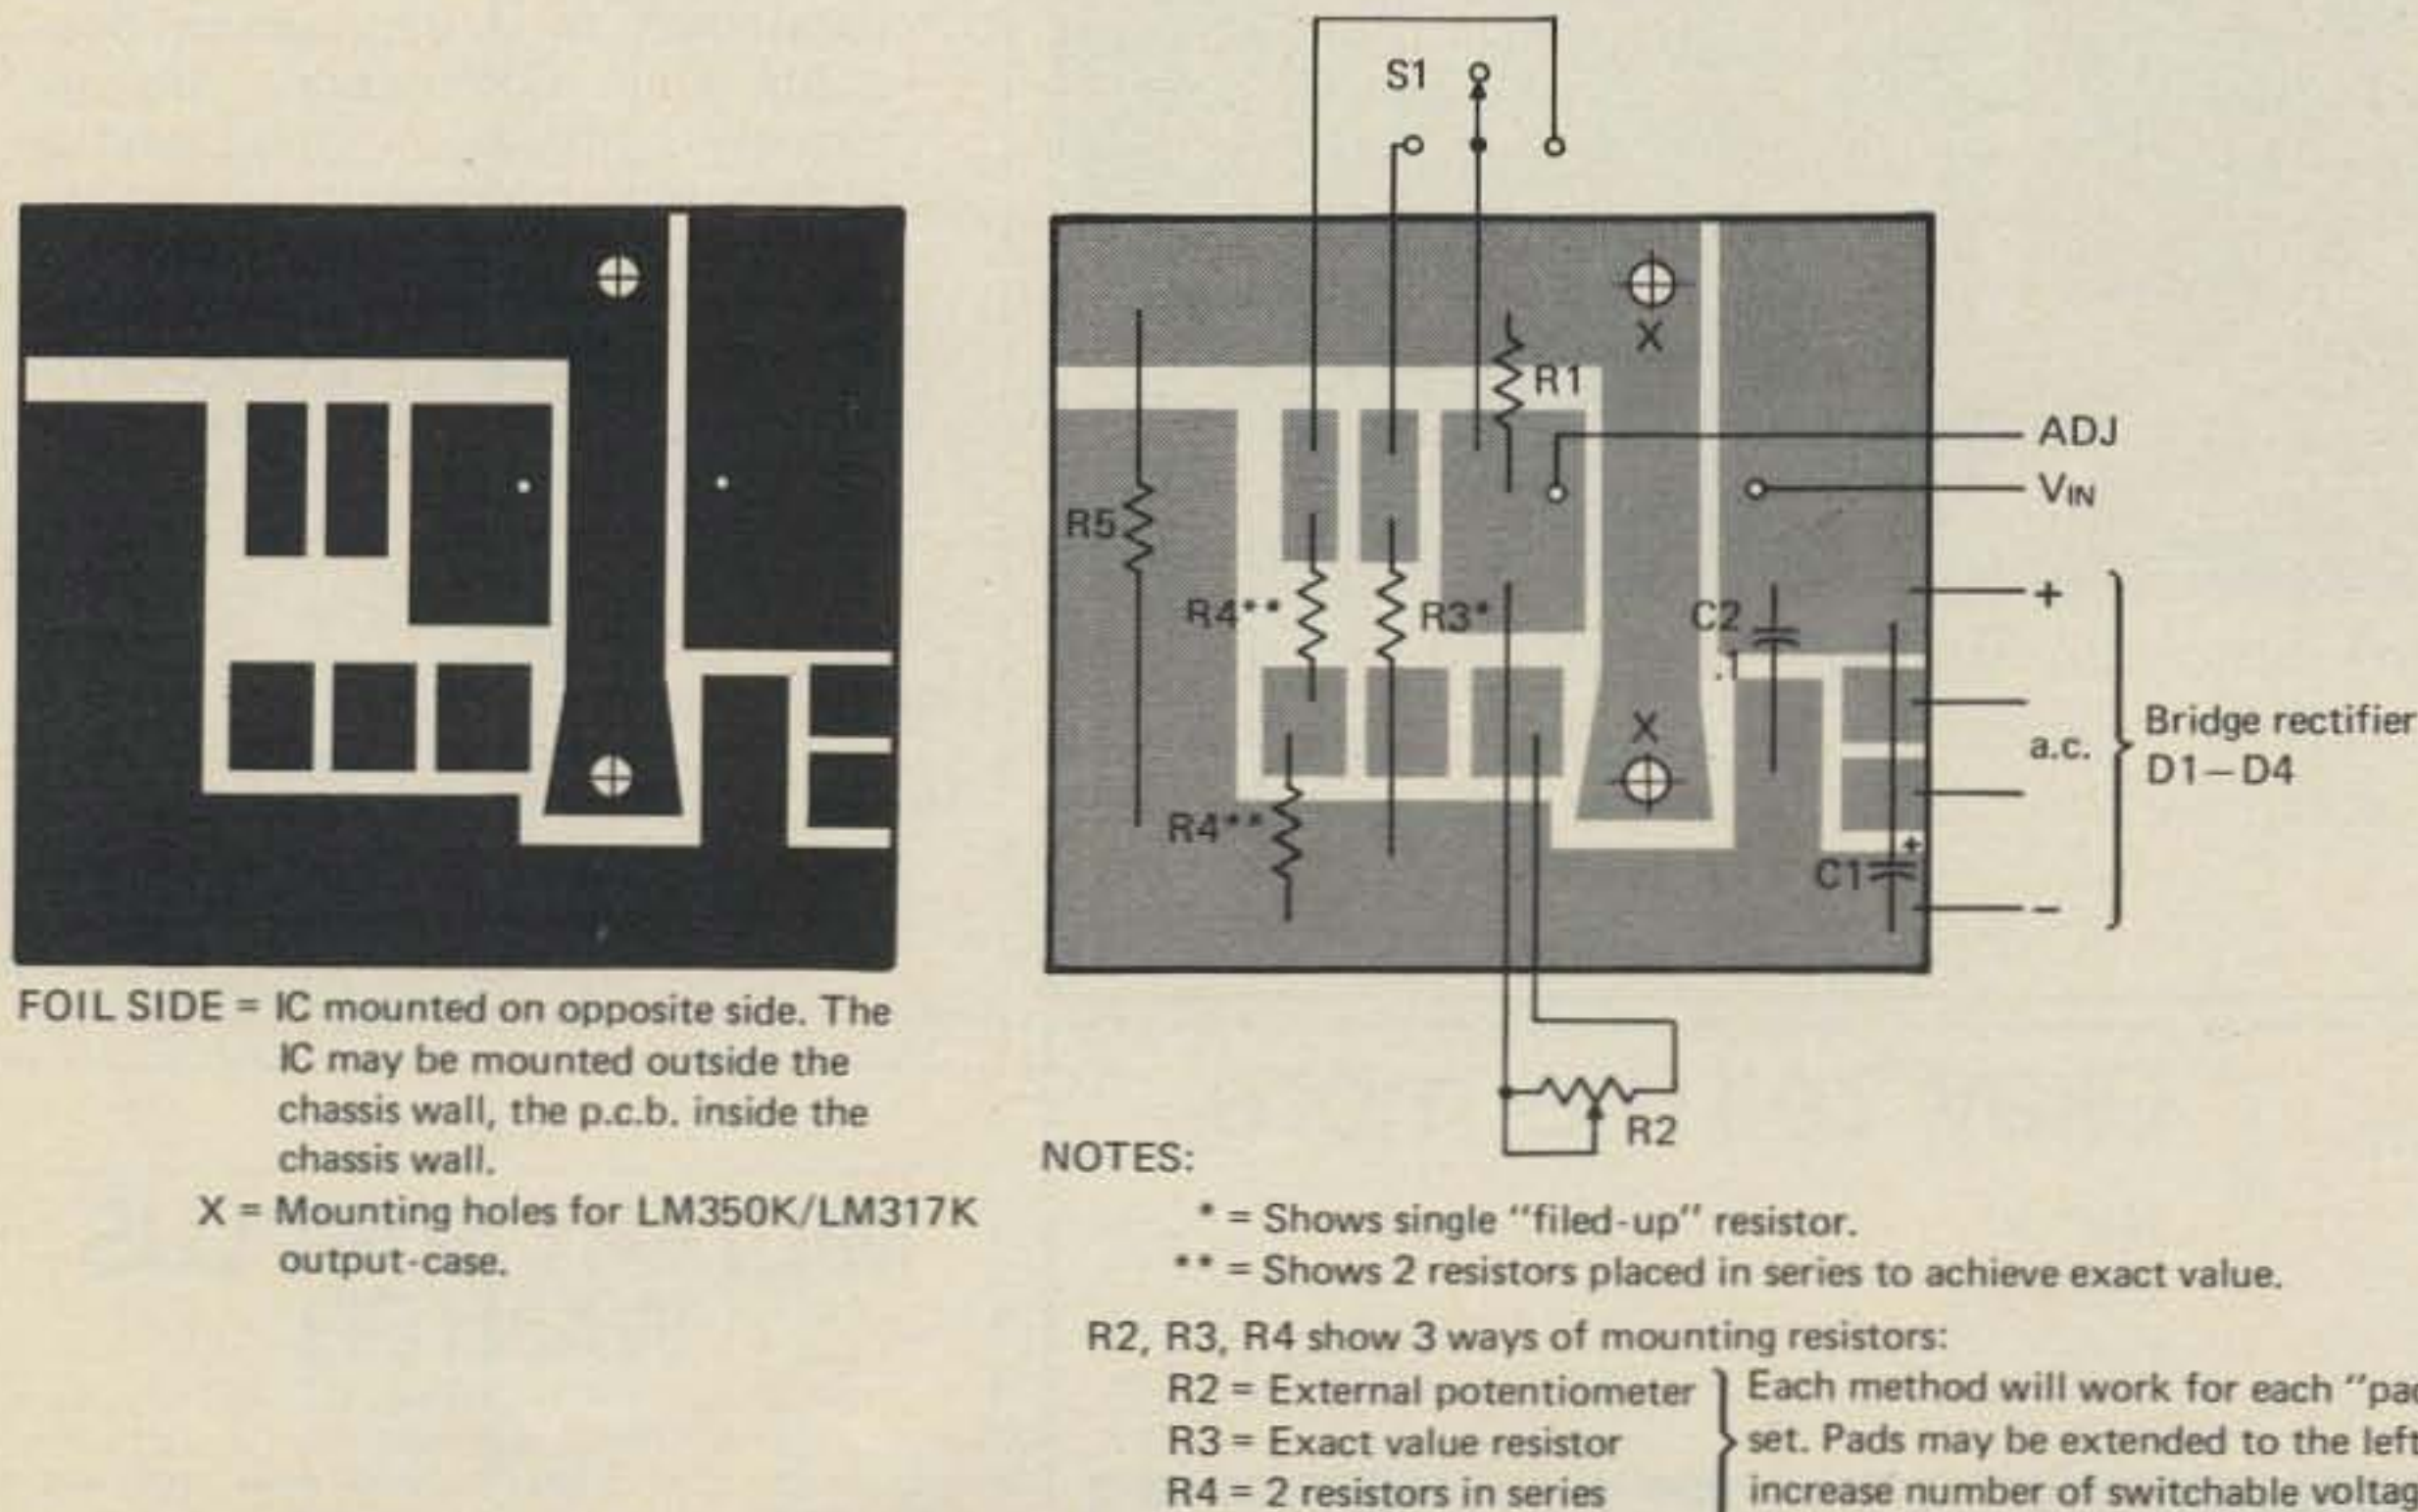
The PC board template and parts layout for the 1.2 - 15 v.d.c. 3 amp power supply.
